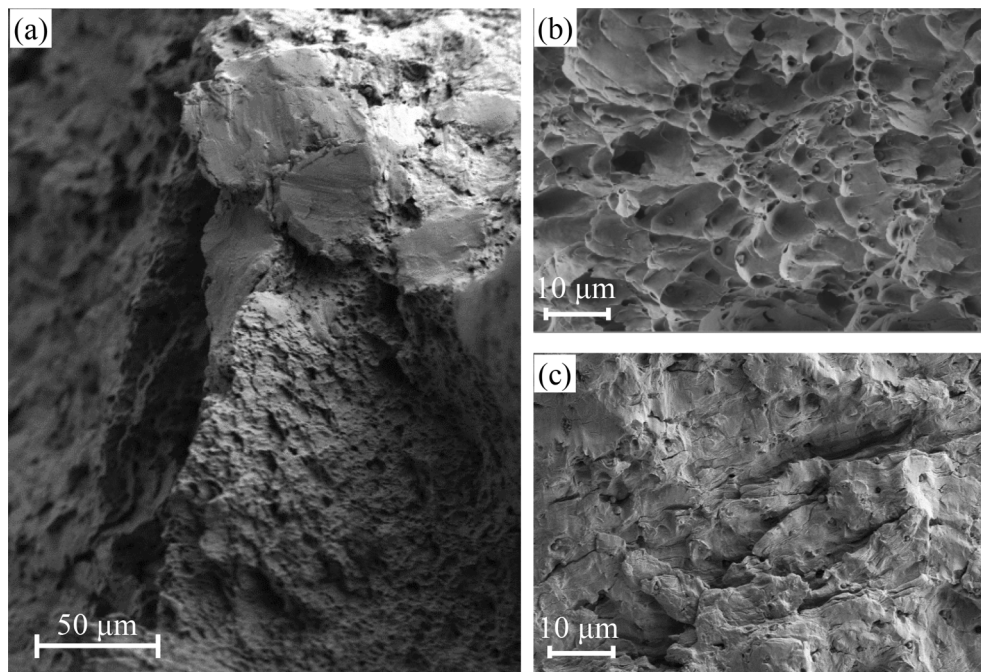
Fracture zone of Coupon AB-90-8: (a) edge; (b) dimples; (c) cleavage failure.
